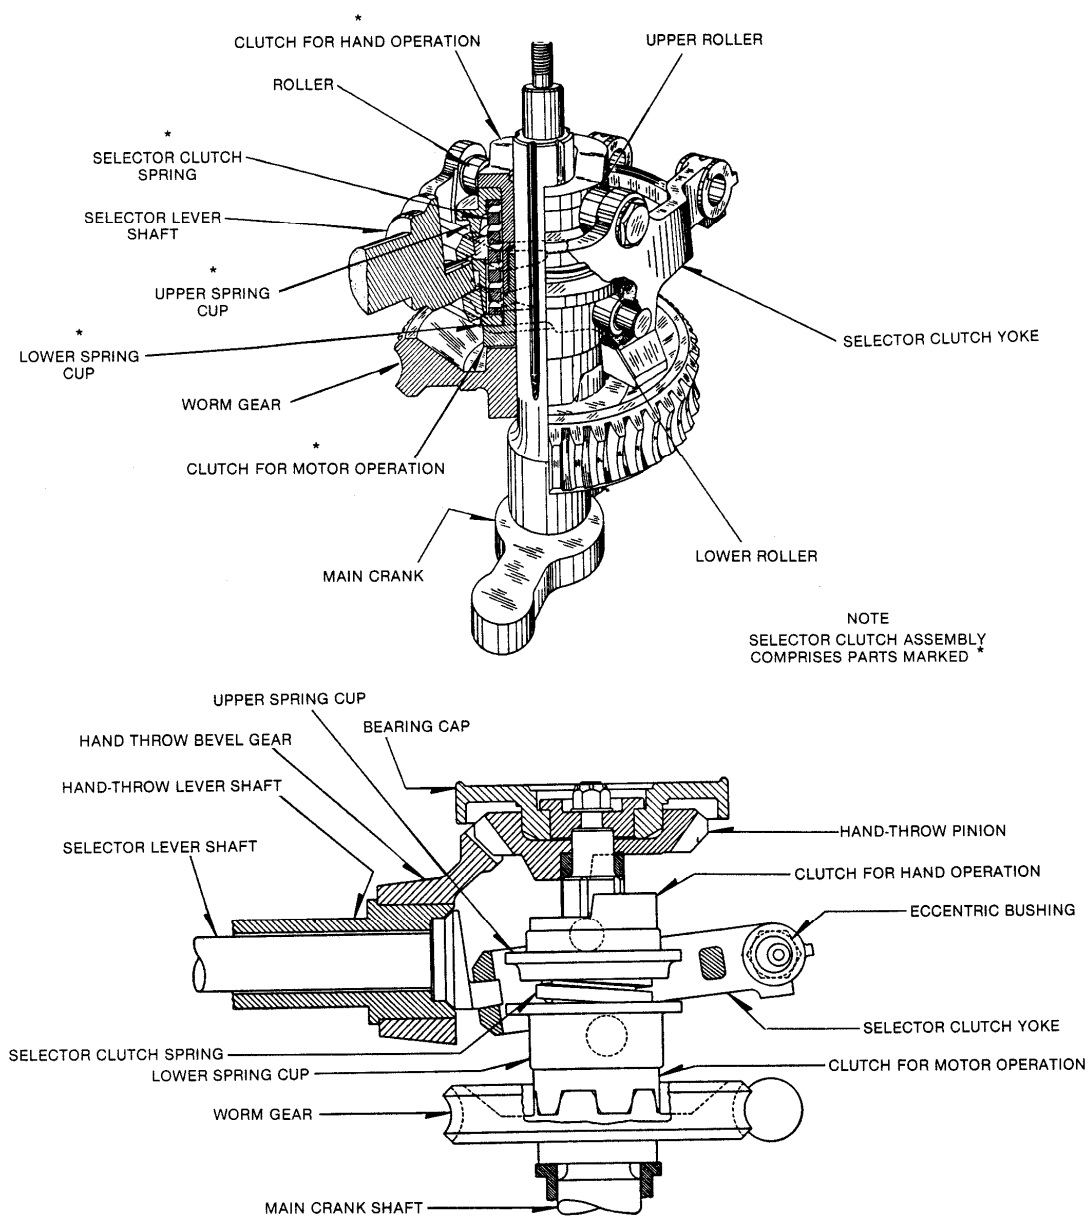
Sectional Views of M-23 Dual-Control Mechanism
